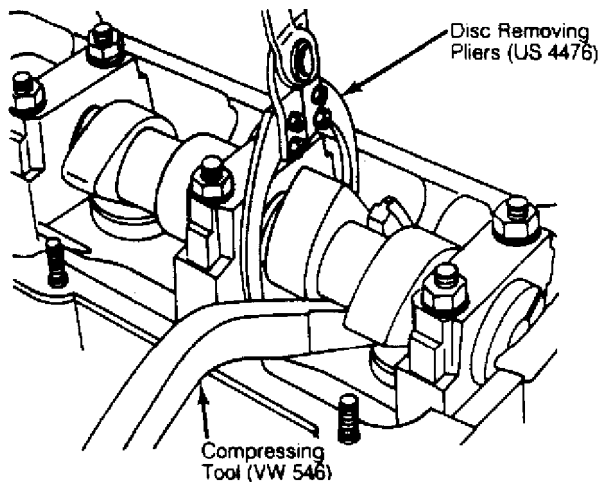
Compressing Cam Follower to Replace Adjusting Disc
